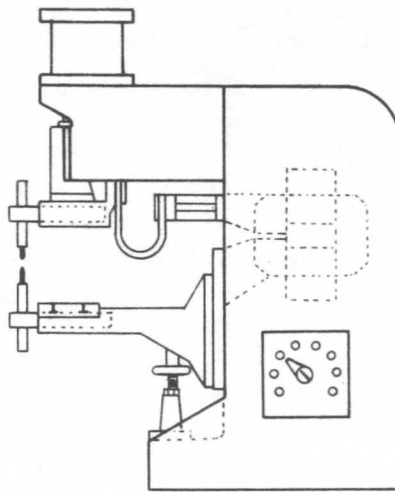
Typical press-type combination spot- and projection-welding machine. (Redrawn by permission from American Welding Society, *Welding Handbook*, 6th ed., 1969, section 2.)
